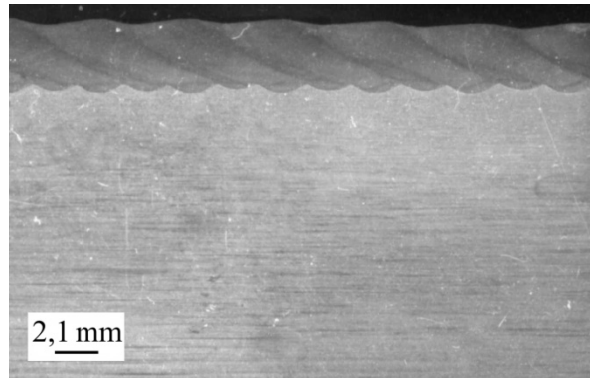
A sample cut in the welding direction from Figure 51, the second bead
